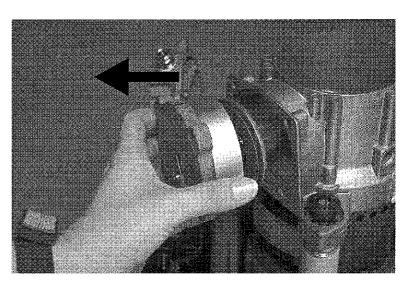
Removing the Valve Plate and Cylinder Sleeve
